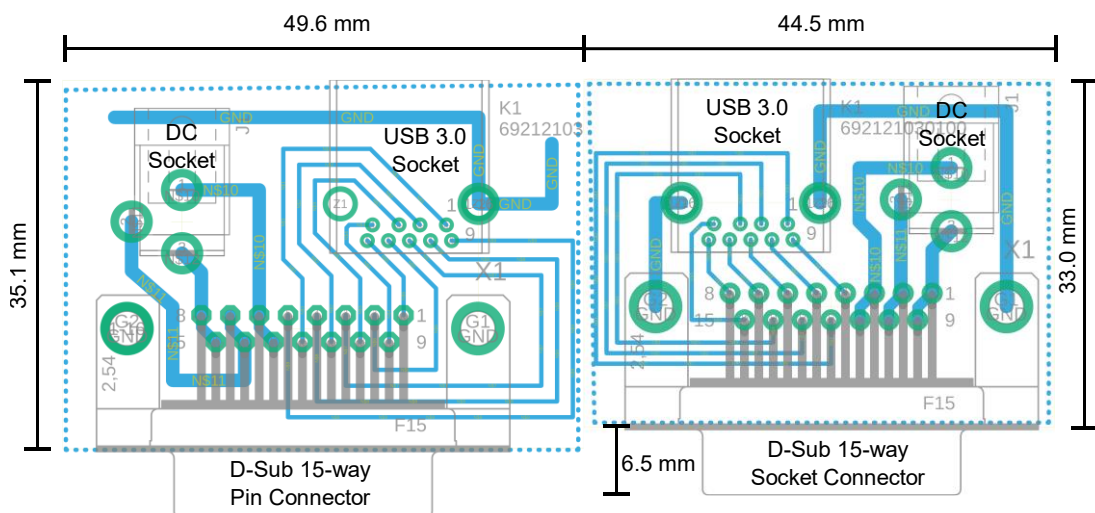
15-way D-Sub connector PCB layouts for pin and socket connector, with USB 3.0 socket connector and DC power socket.
